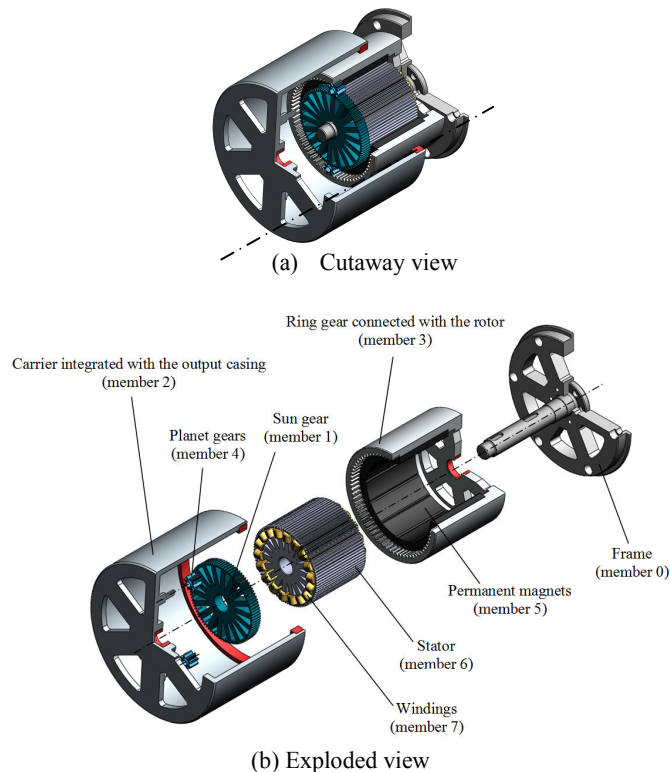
The proposed geared motor with an exterior-rotor configuration
